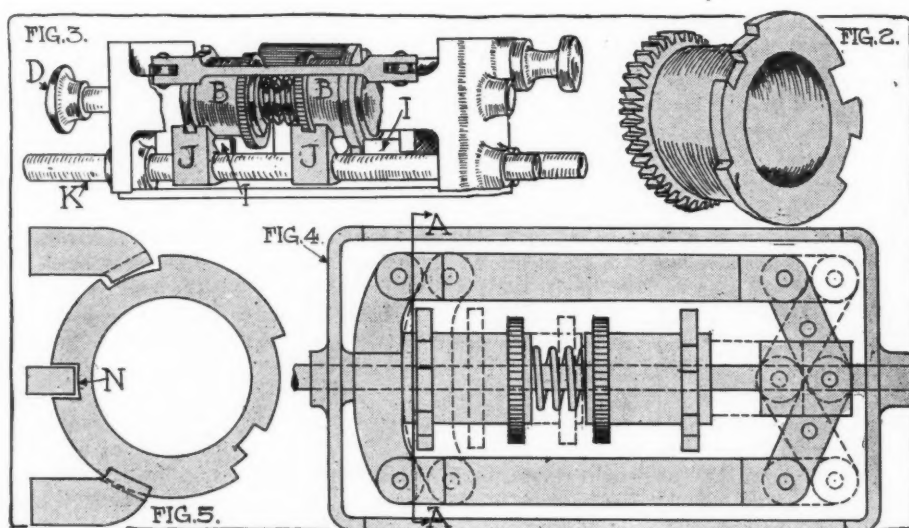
Selector, showing cam and gear. Fig. 3—Side broken away to show the meshing of selector B with finger J at left. Fig. 4—Top view, showing mechanism for compressing spring. Fig. 5—Section through A-A. Fig. 4, showing position of cam
